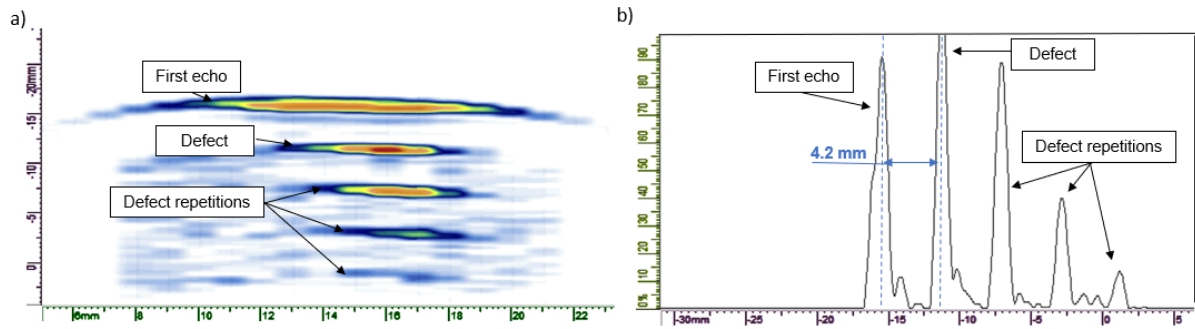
Defect A under machined surface, inspected with a 5 MHz PAUT probe: a) B-scan b) A-scan.
